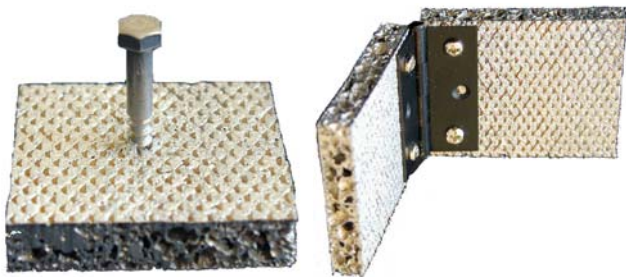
Examples of joining possibilities of reinforced aluminium foams
